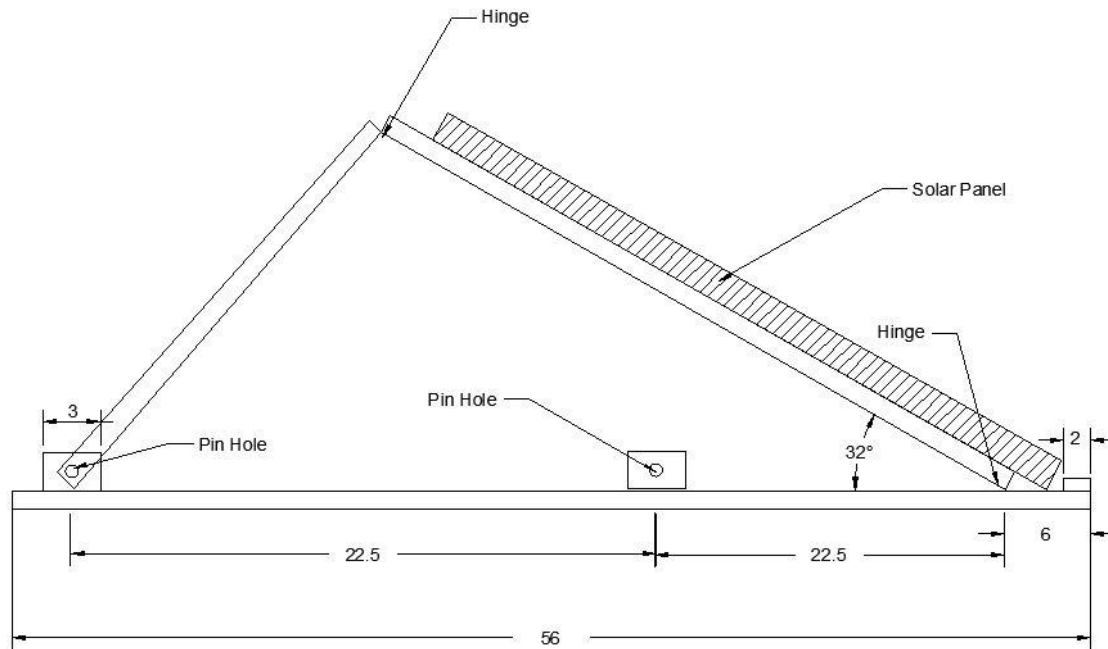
Side View of Solar Panel Adjustable Frame at 32°, units in inch
